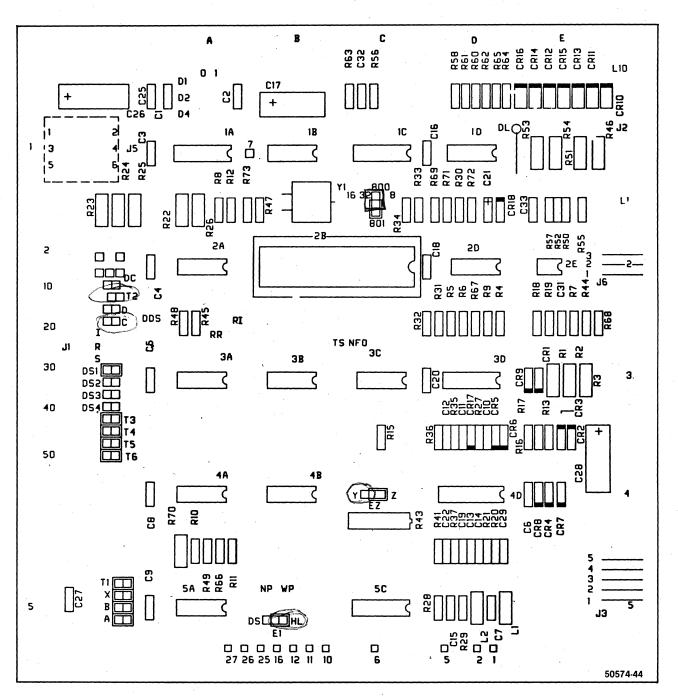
PCB COMPONENT LOCATIONS P/N 25229
